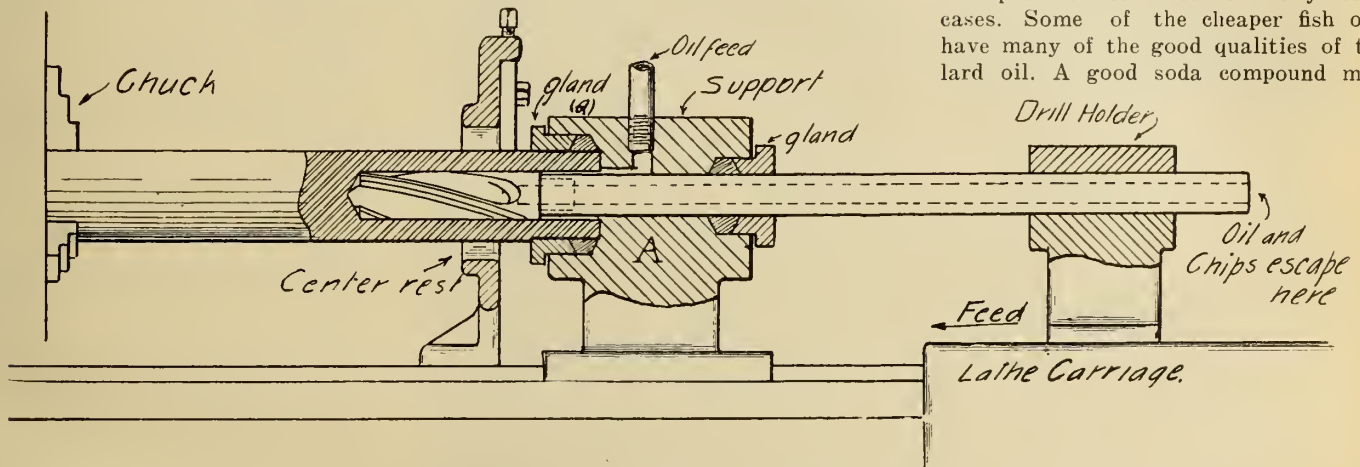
Method of Using Special Deep Hole Twist Drill.
